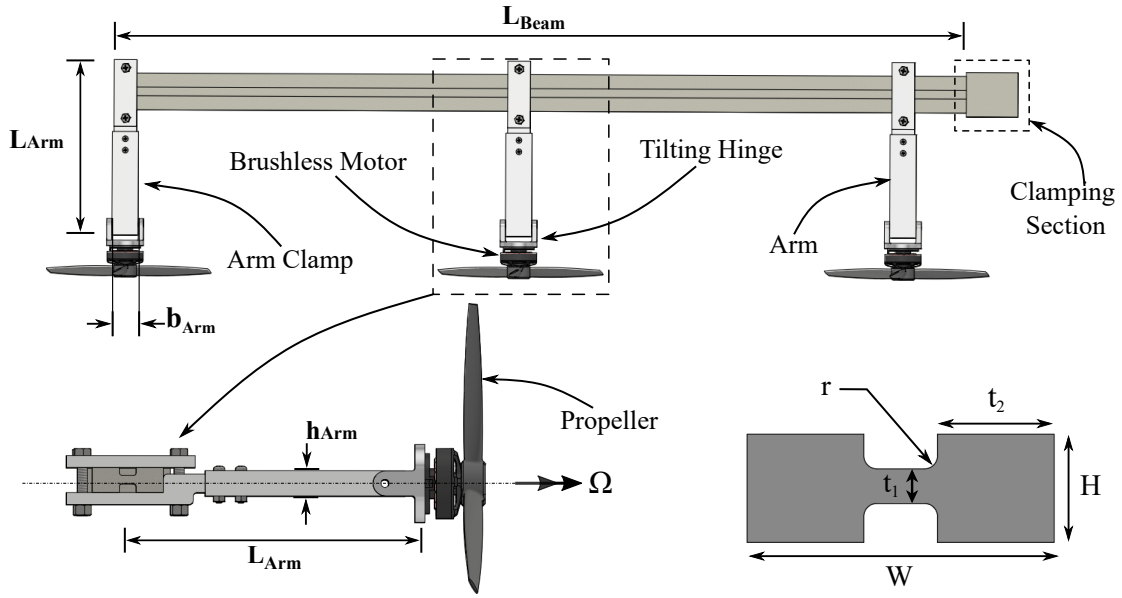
Overview of the Bristol Multirotor Test Rig Assembly.
